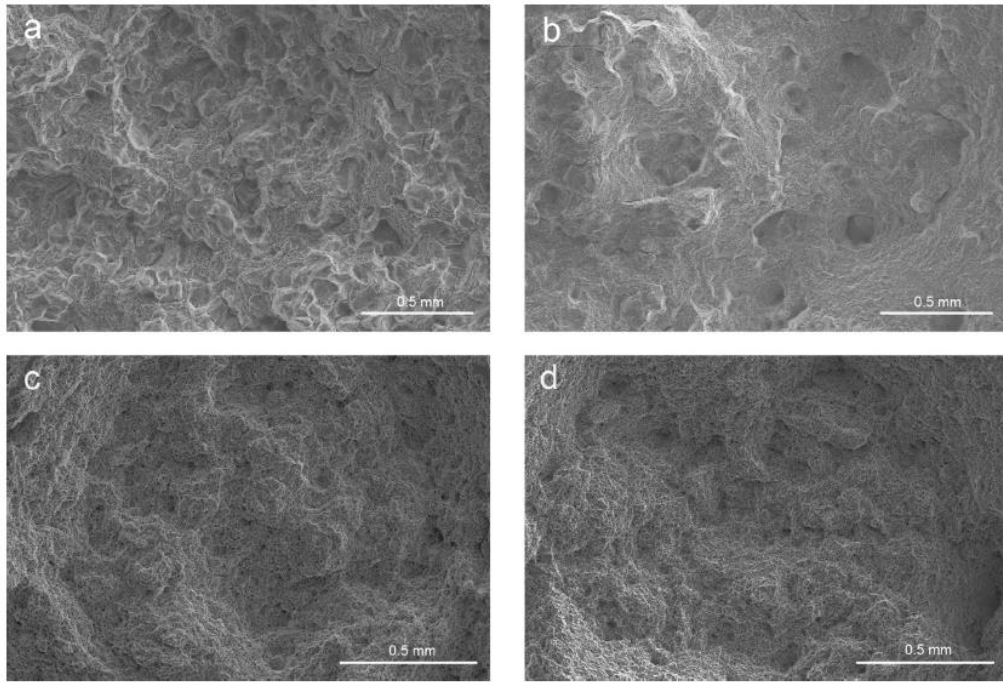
SEM images of the fracture surfaces, showing intergranular fracture in Ref (a) and A (b), and completely ductile fracture surfaces for B (c) and C (d).
